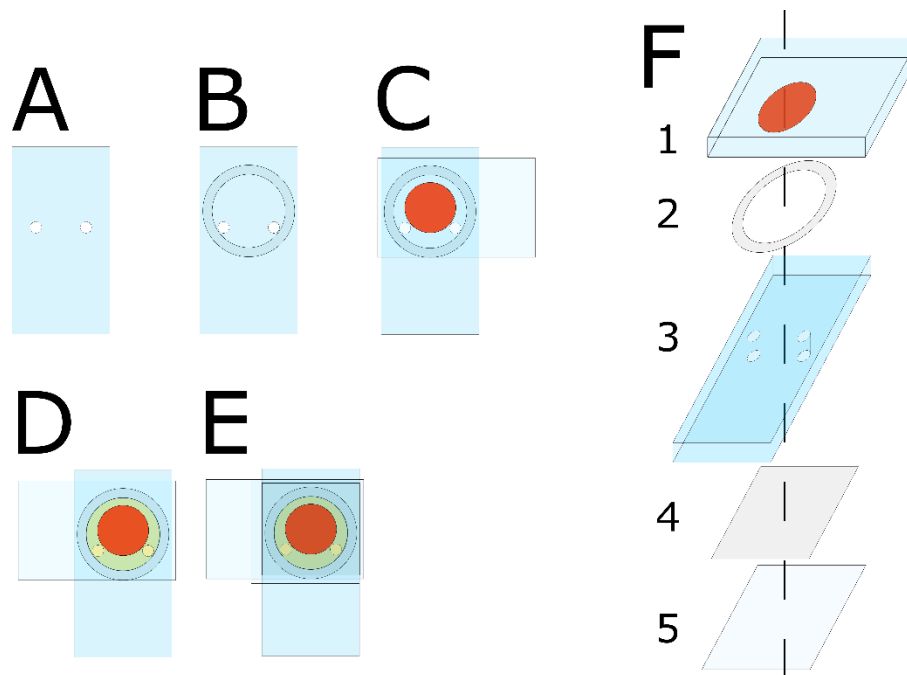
(A-E) Steps of DSSC assembly. (F) Exploded view of DSSC.
